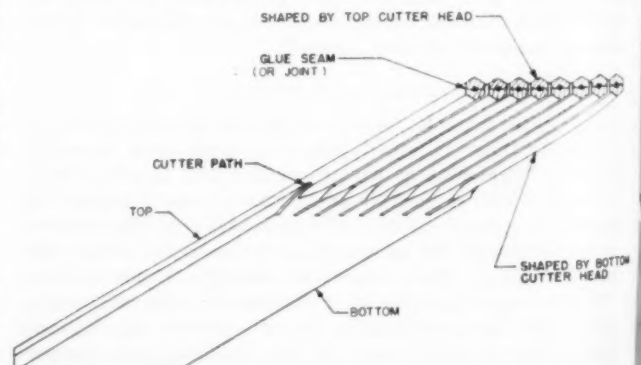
PENCIL BLOCK AFTER PASSING UNDER FIRST CUTTER HEAD AND PARTIALLY OVER SECOND CUTTER HEAD
